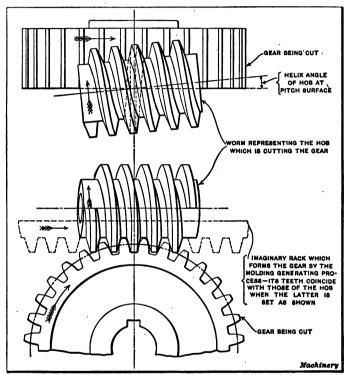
Diagram illustrating the Principle of the Hobbing Process of Forming Spur Gears
